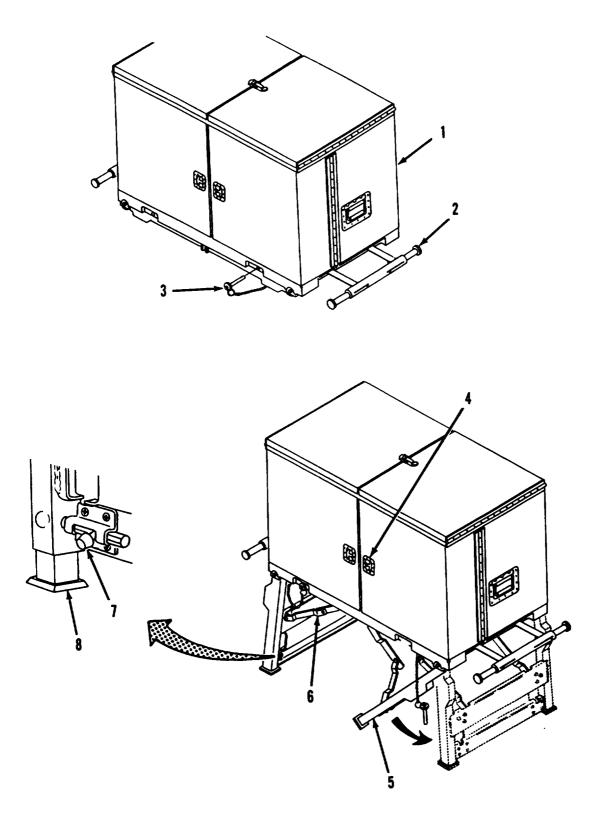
Cabinet Assembly Packing (Sheet 1 of 2),
